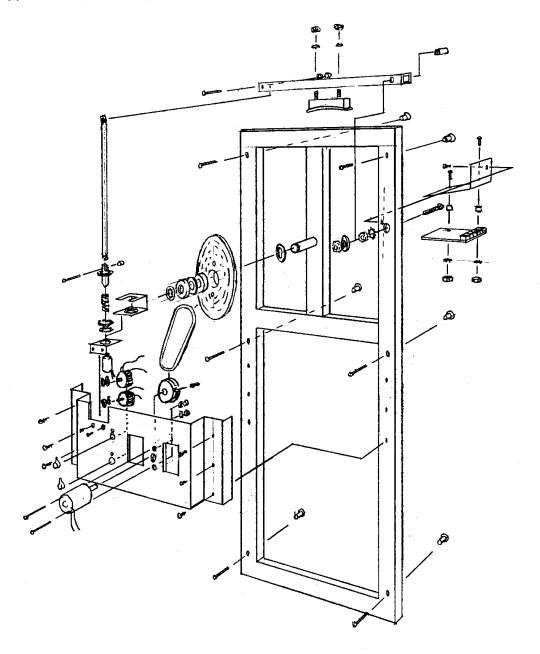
Motor, Brake, Encoding Wheel Assembly Drawing #1
